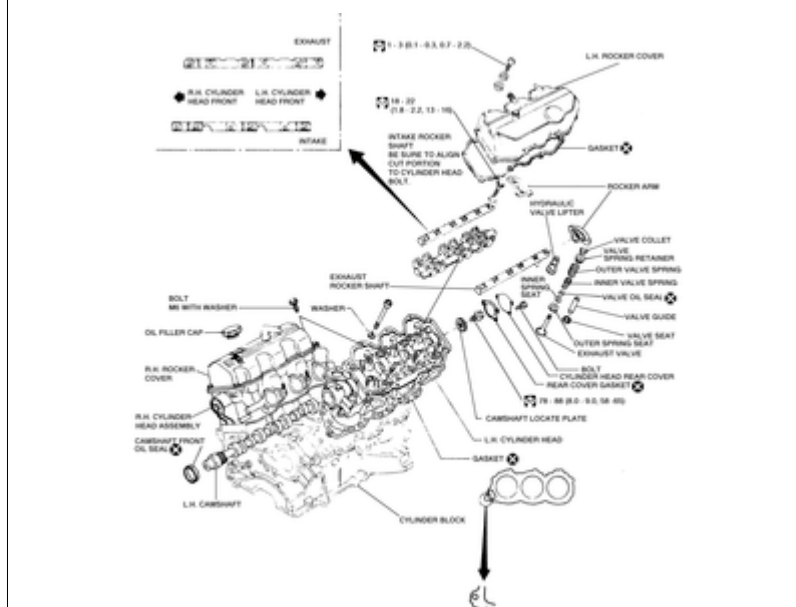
Exploded view of the cylinder head assembly — VG30i engine
